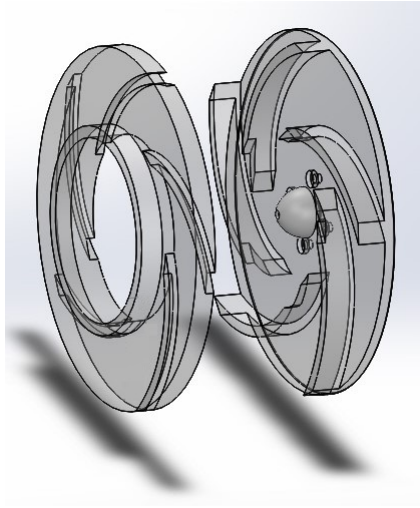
Hub and shroud parts picture drawn in *Solidworks[™]* program
